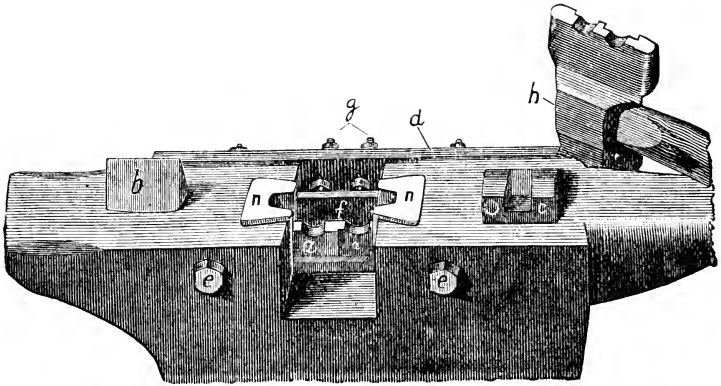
Anvil for making screws. *a*, mould for forming shank; *b*, cutter; *c*, mould for making sharp-headed screws; *d*, plate carrying set screws, *g*, and held in position by the two screws, *e*, *e*; *f*, die carrying the moulds, *a*, *a*. This can be set at any distance from the plate, *d*, by moving the set screws, *g*. The length of the shank is thus fixed; *h*, forging hammer.
